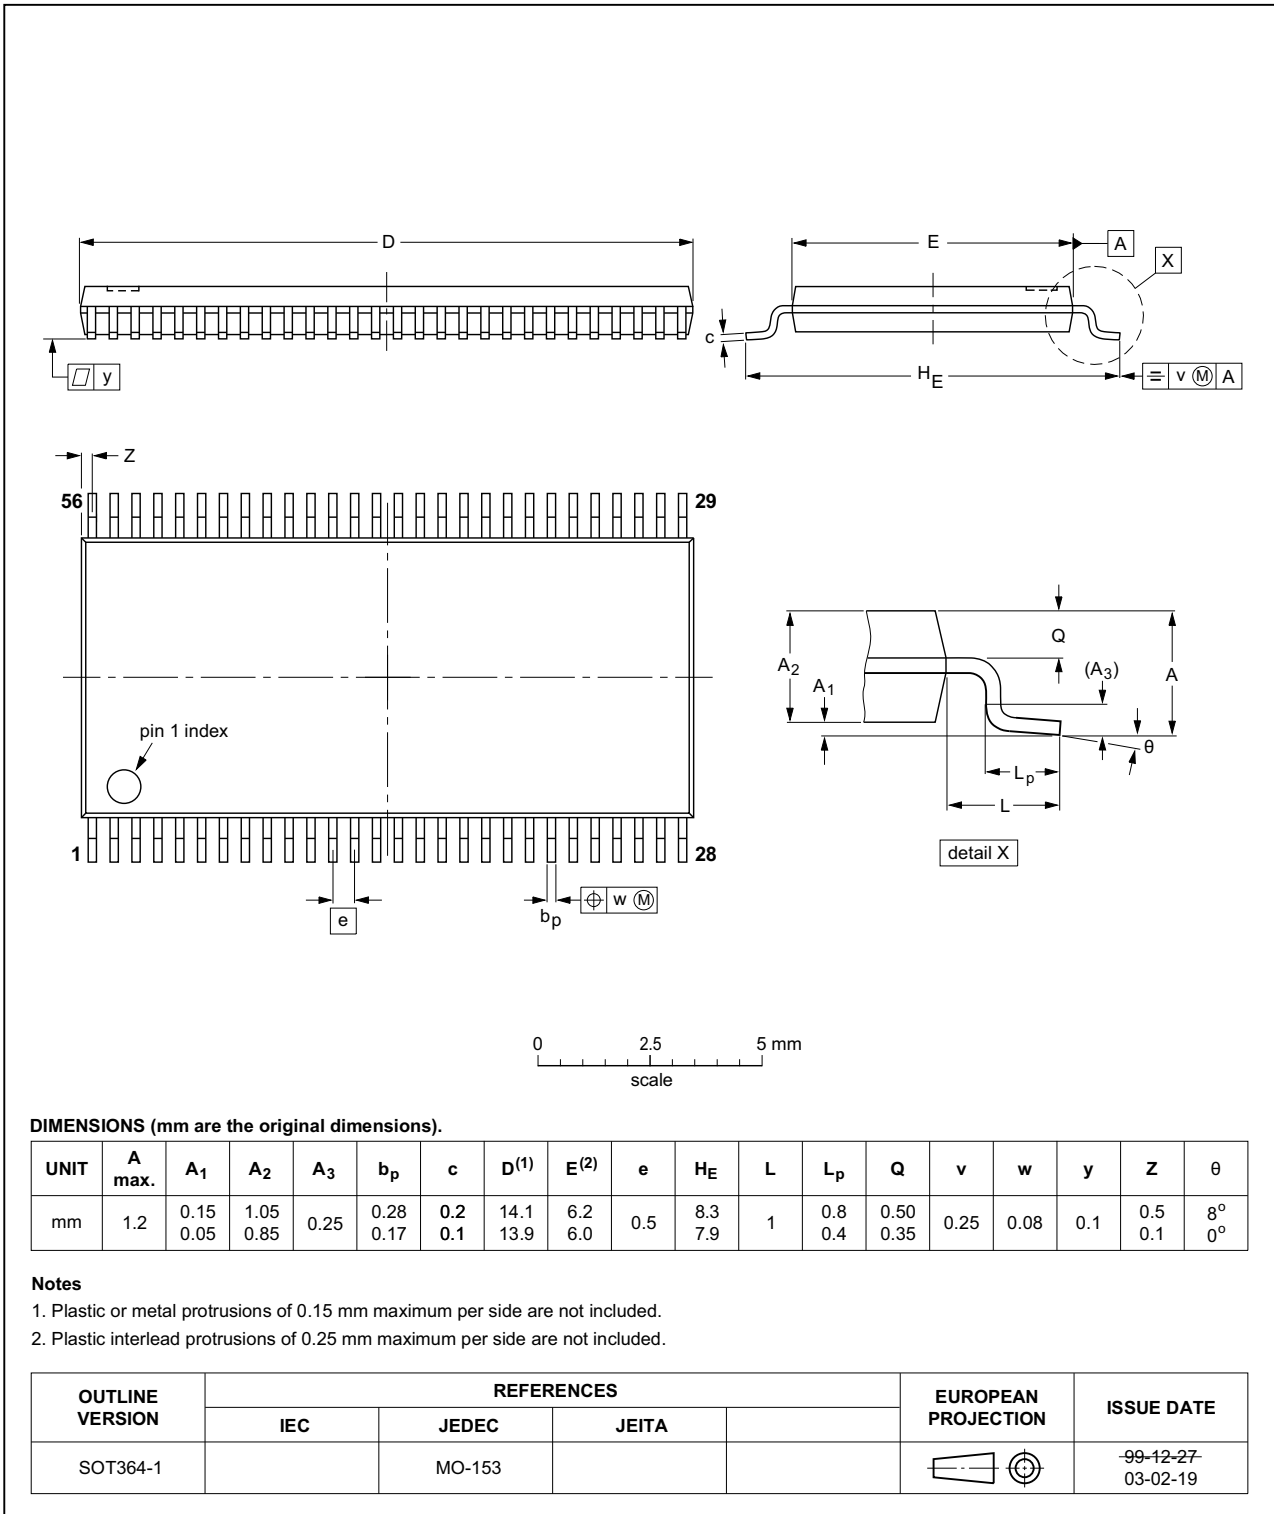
Package outline SOT364-1 (TSSOP56) of PCF85176T
